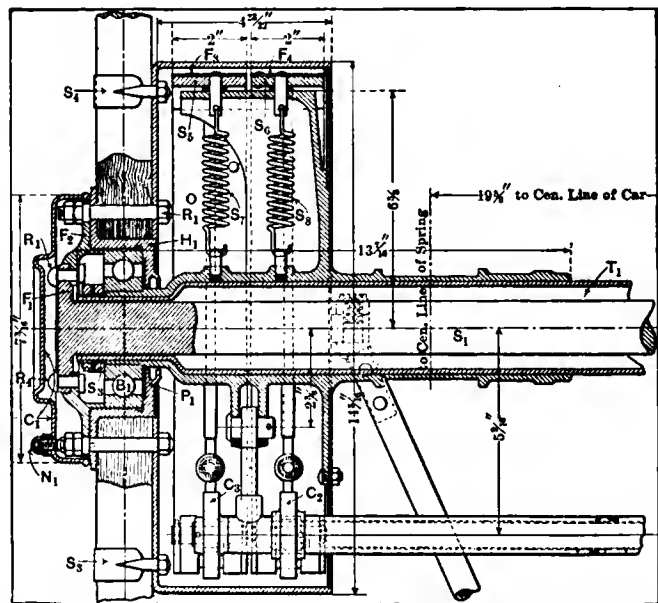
Marmon type of live rear axle employing a single annular ball bearing in the plane of the wheel
